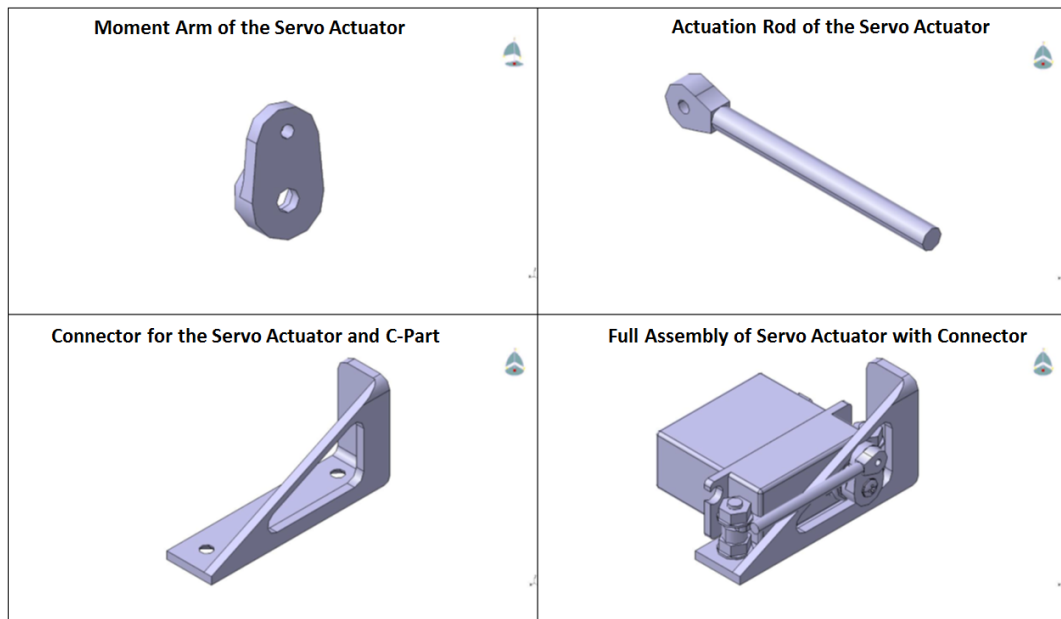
Moment arm, designed actuation rod, C part connector of Volz DA 13-05-60 servo actuator and full assembly of them [36] [1]
